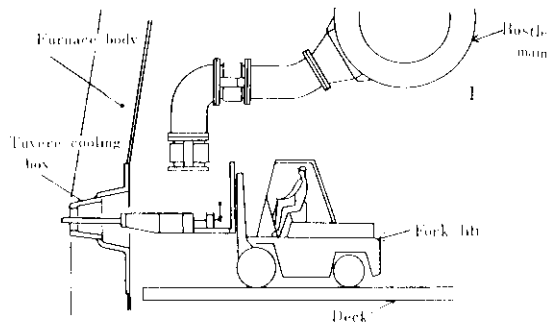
Schema of operation by using Tuyere cooling box pulling out machine
